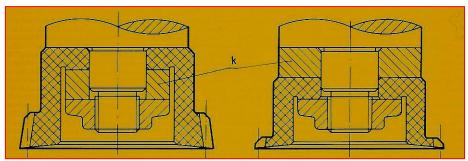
Deep counterbore shaper cutters at the beginning of life and end of life, mounted properly
